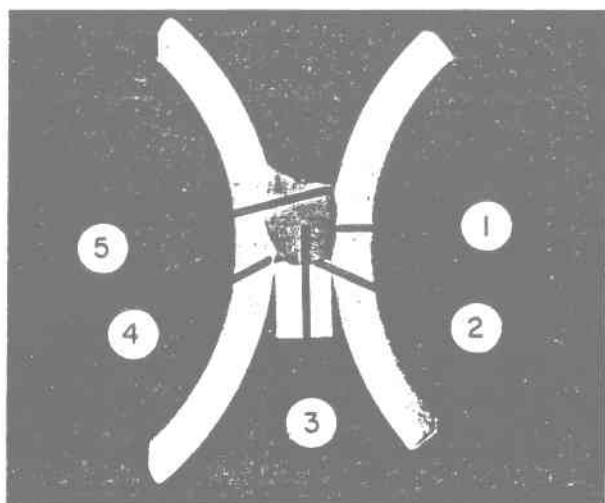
Macroscopic Cross Sections of Panel Weld Cut From First Development Panel
